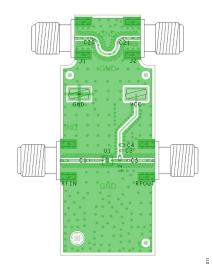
EV2HMC788ALP2 Assembly Drawing (J1 and J2 are Not Installed)
